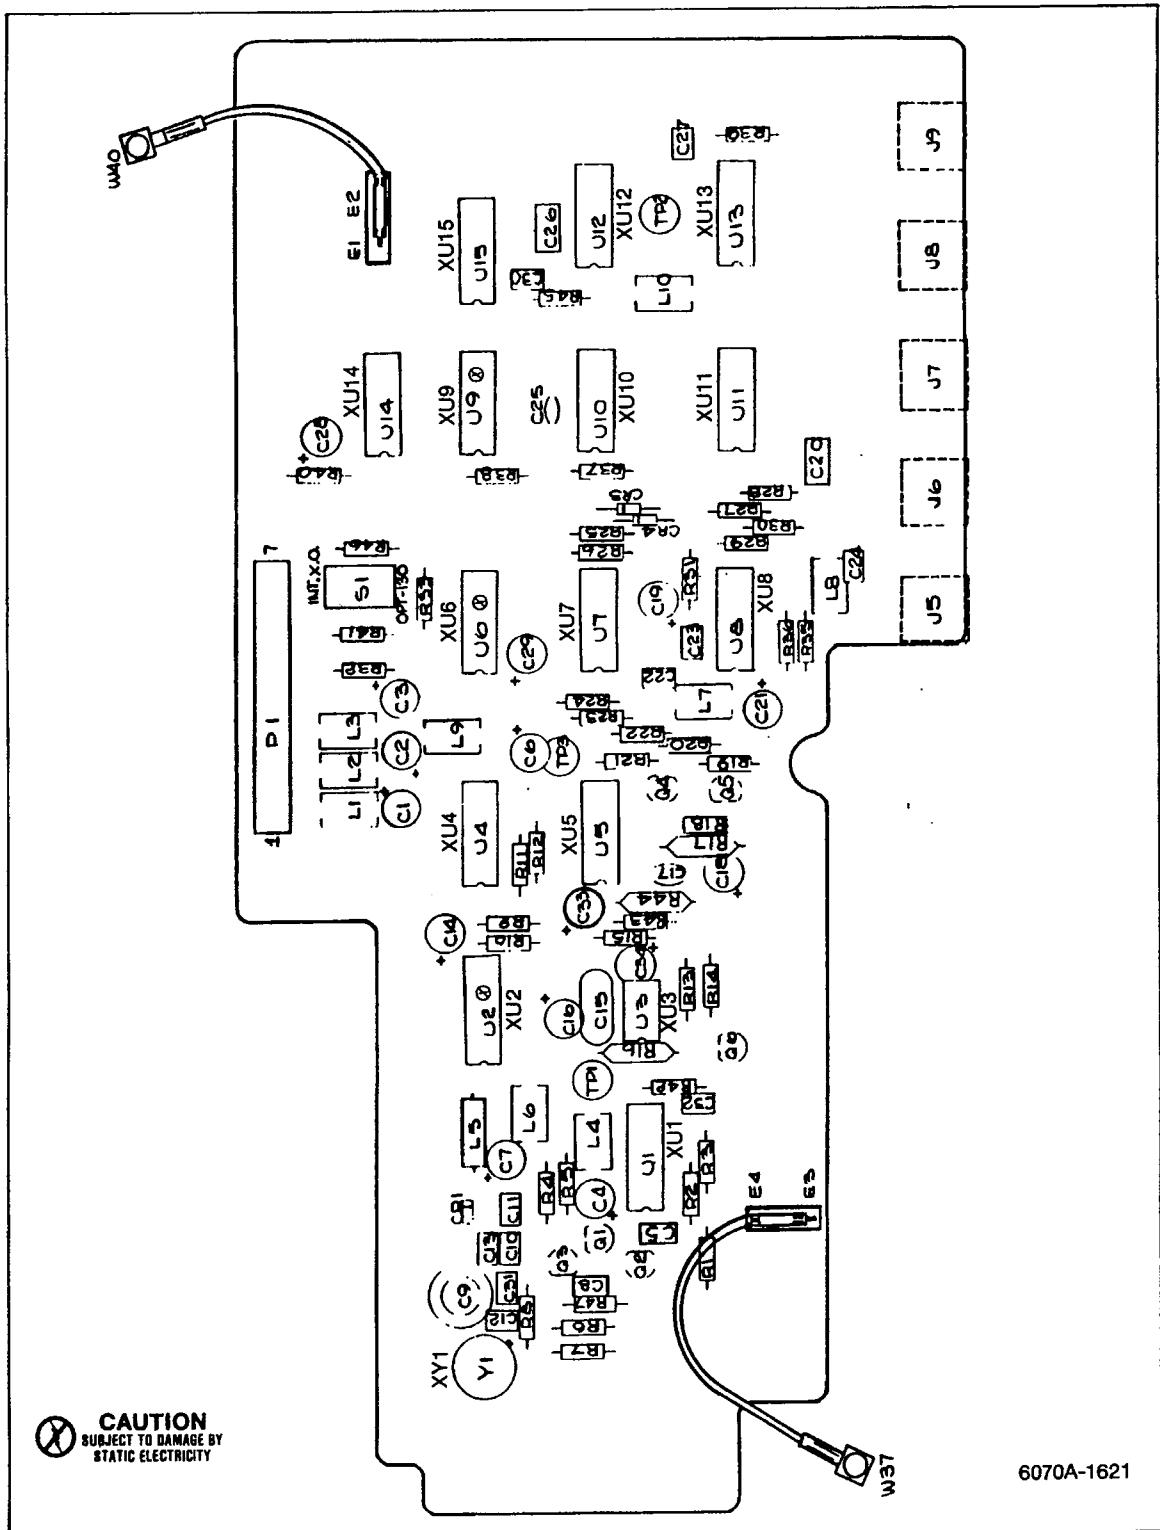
A3A2 10 MHz Reference PCB Assembly
